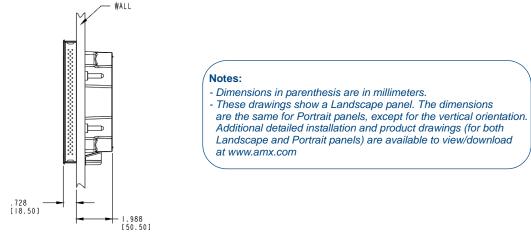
MXD-1901-PAN-L Installation Dimensions (side view)
